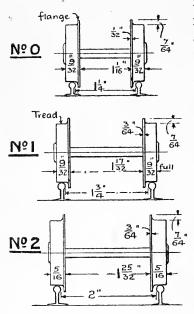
Standard Gauges and Wheel Dimensions (Indoor Model Railways)
